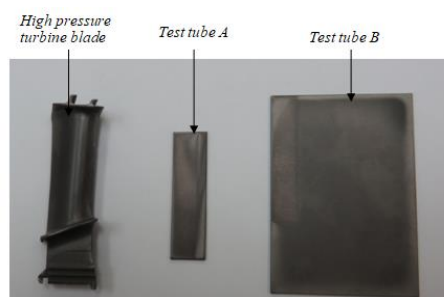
Layout of the high-pressure turbine blade and test tubes A and B
